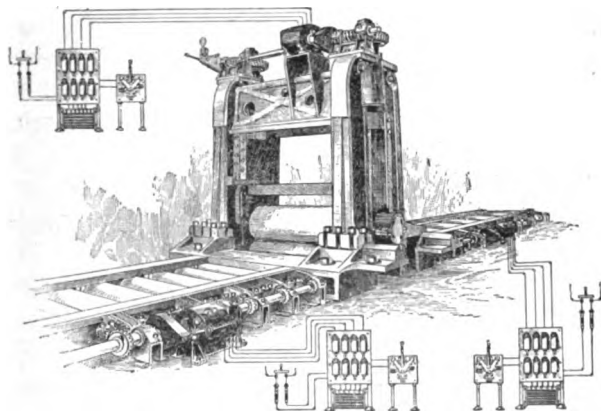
TYPICAL INSTALLATION MAGNET SWITCH CONTROLLERS AND DIRECT-CURRENT MILL MOTORS OPERATING ROLL TABLE
